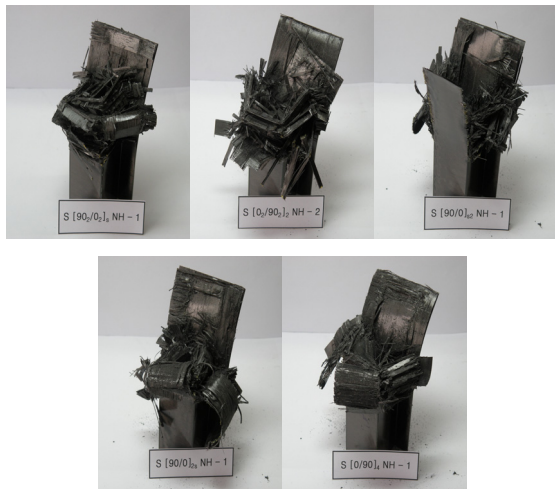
Collapsed shaped of CFRP hat-shaped sectional members (outer angle 90°, dry specimen)
